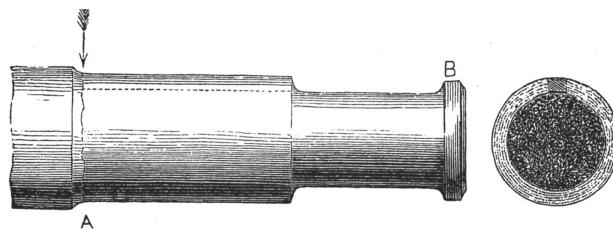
Glynn's drawing of a fatigue failure in an axle.
